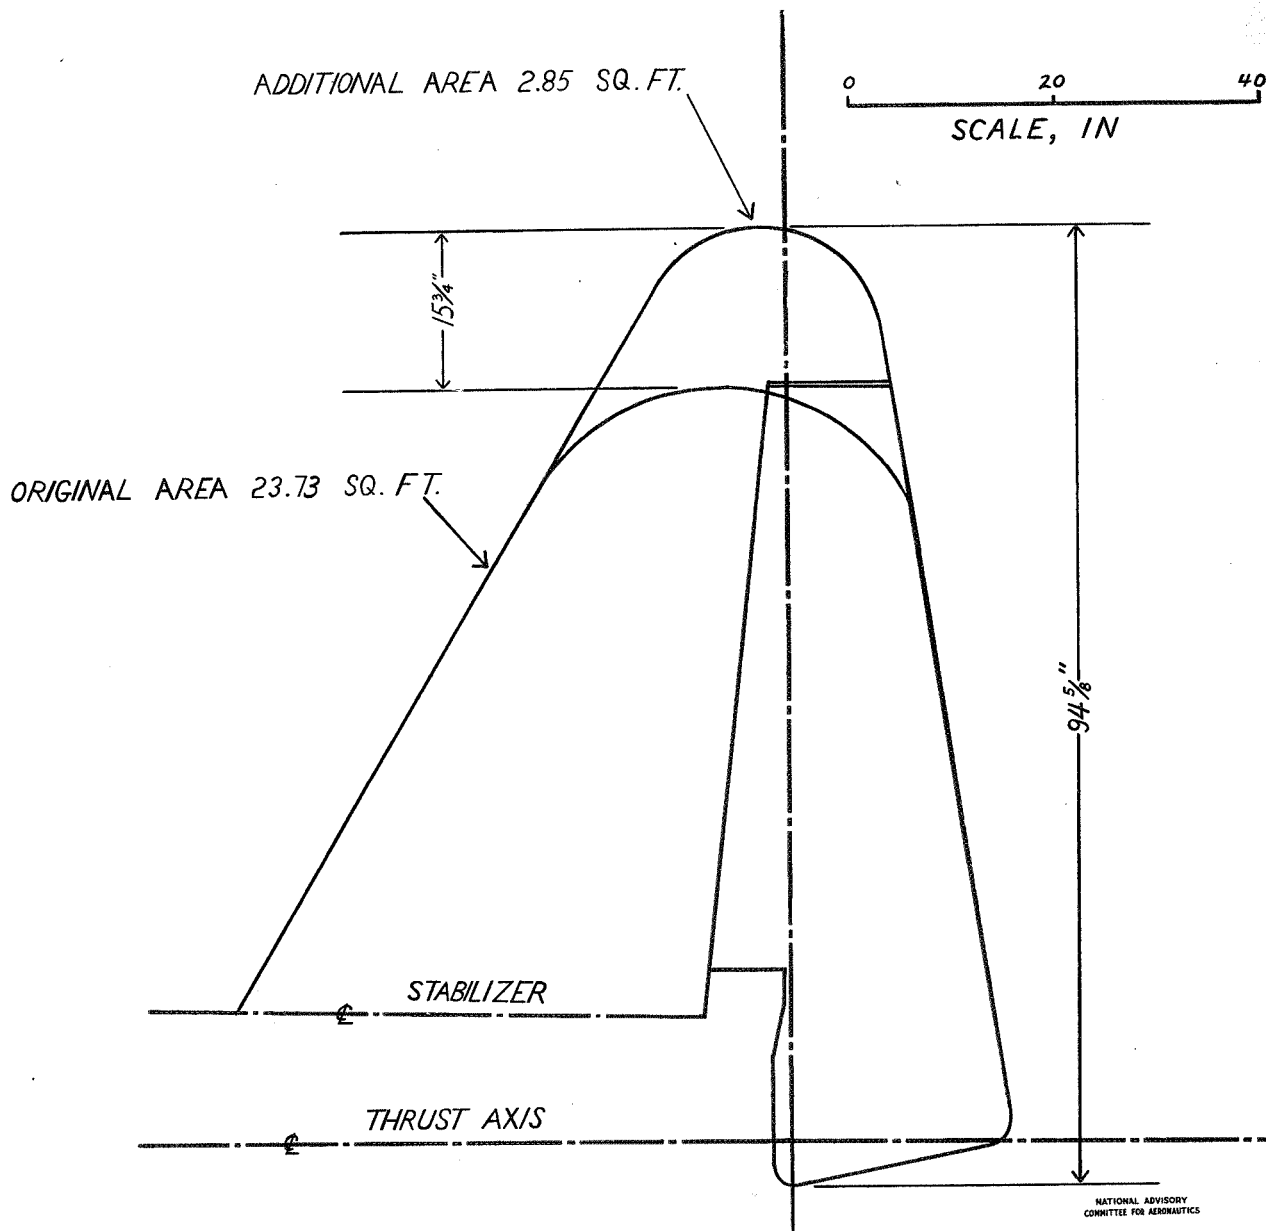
ORIGINAL AND ENLARGED VERTICAL TAIL SURFACES TESTED ON P-63A-1 AIRPLANE
